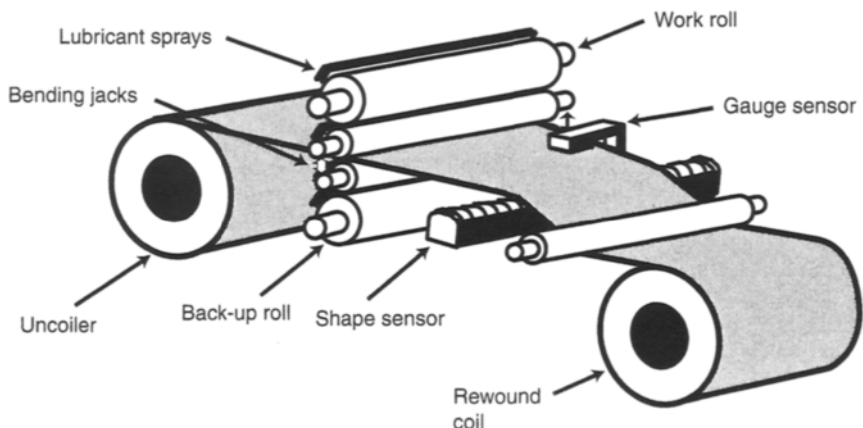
General arrangement of equipment on a four-high cold mill for rolling can body stock.
